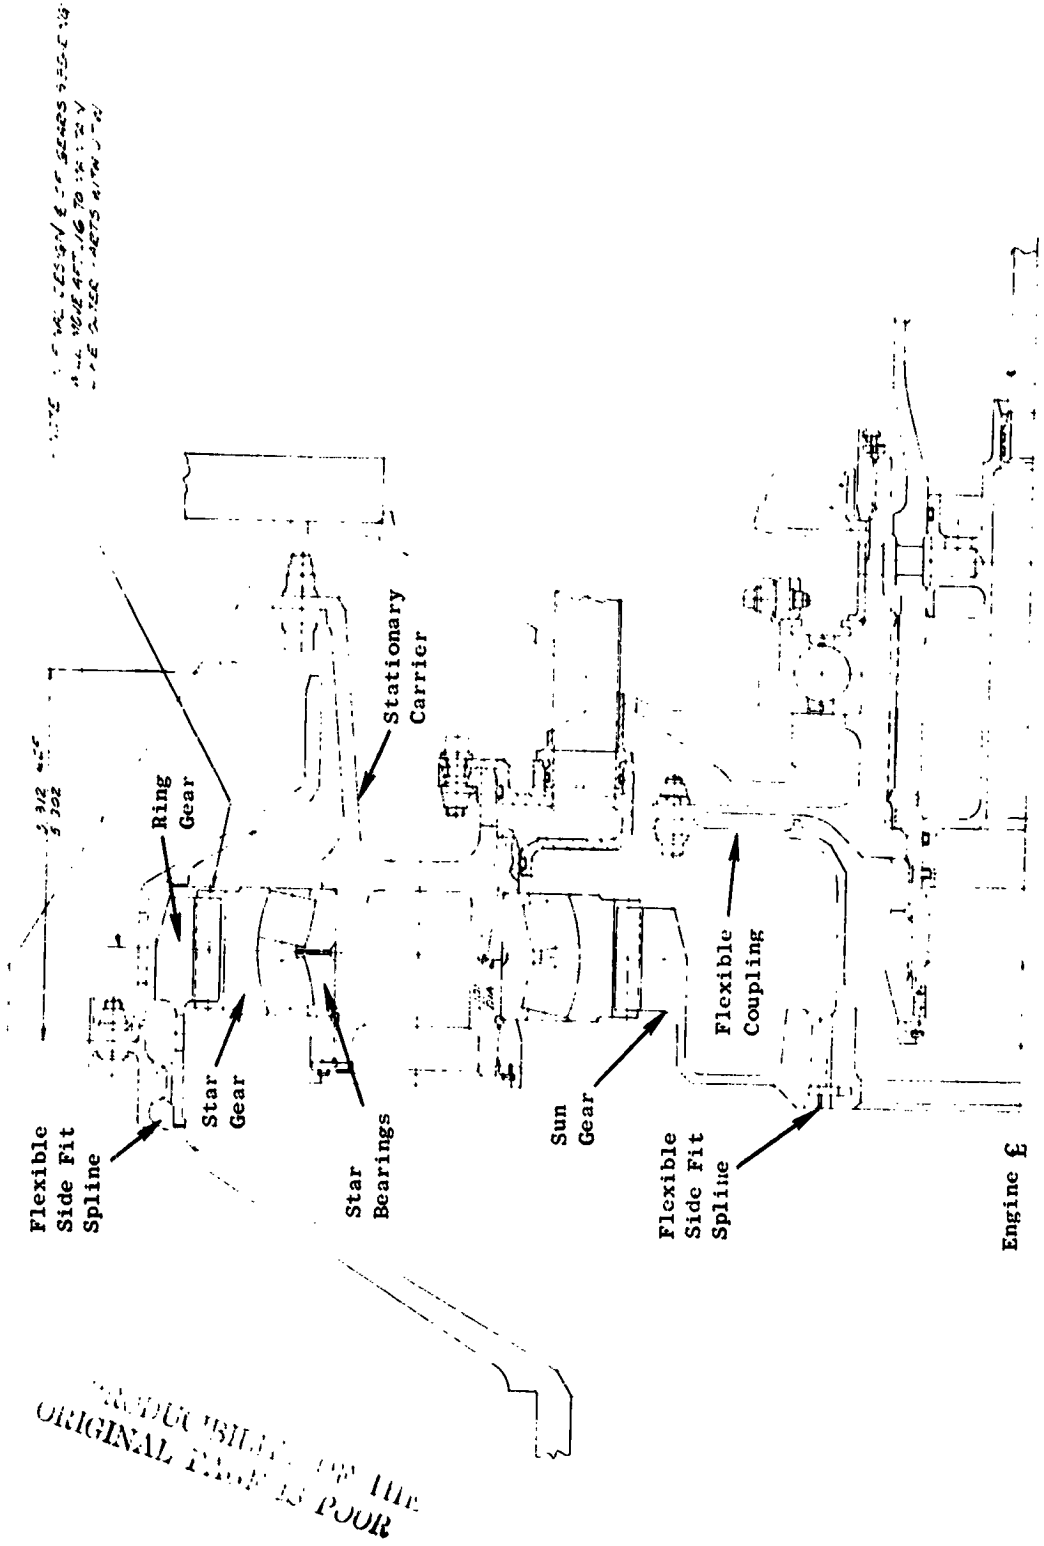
Preliminary Design, Main Reduction Gear - OTW.
